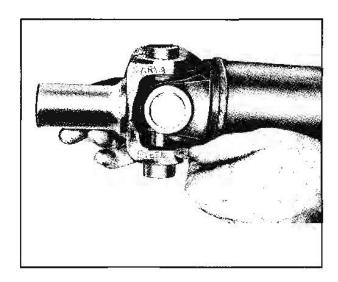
A-5 Placing Washers Inside Bearing of Splined Yoke Memoer
